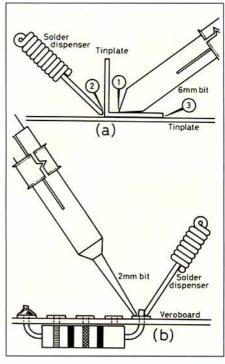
(a) Using a large bit to solder tin plate; (b) Using a small bit for components. Note the handy solder dispenser.
